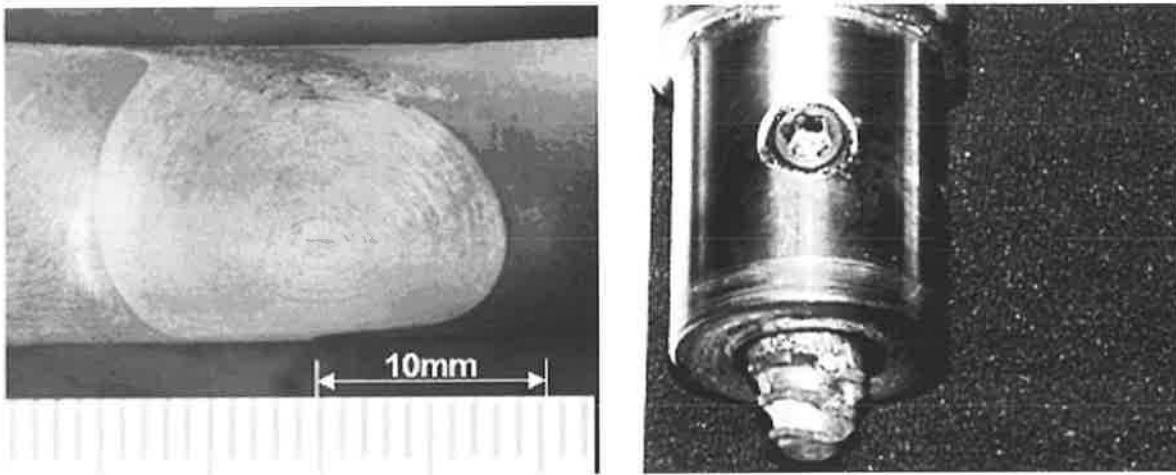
Weld macrograph (left caption) and welding tool (right caption) used in the production of weld 820A.
